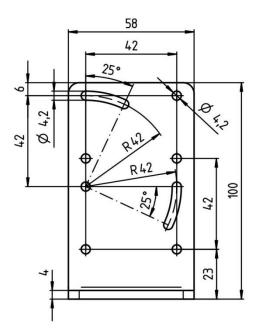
Dimension drawing BE 901 FA-001 mounting device (all dimensions in mm)
